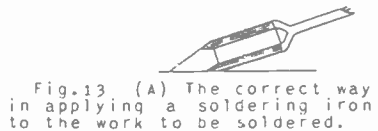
(A) The correct way in applying a soldering iron to the work to be soldered.
